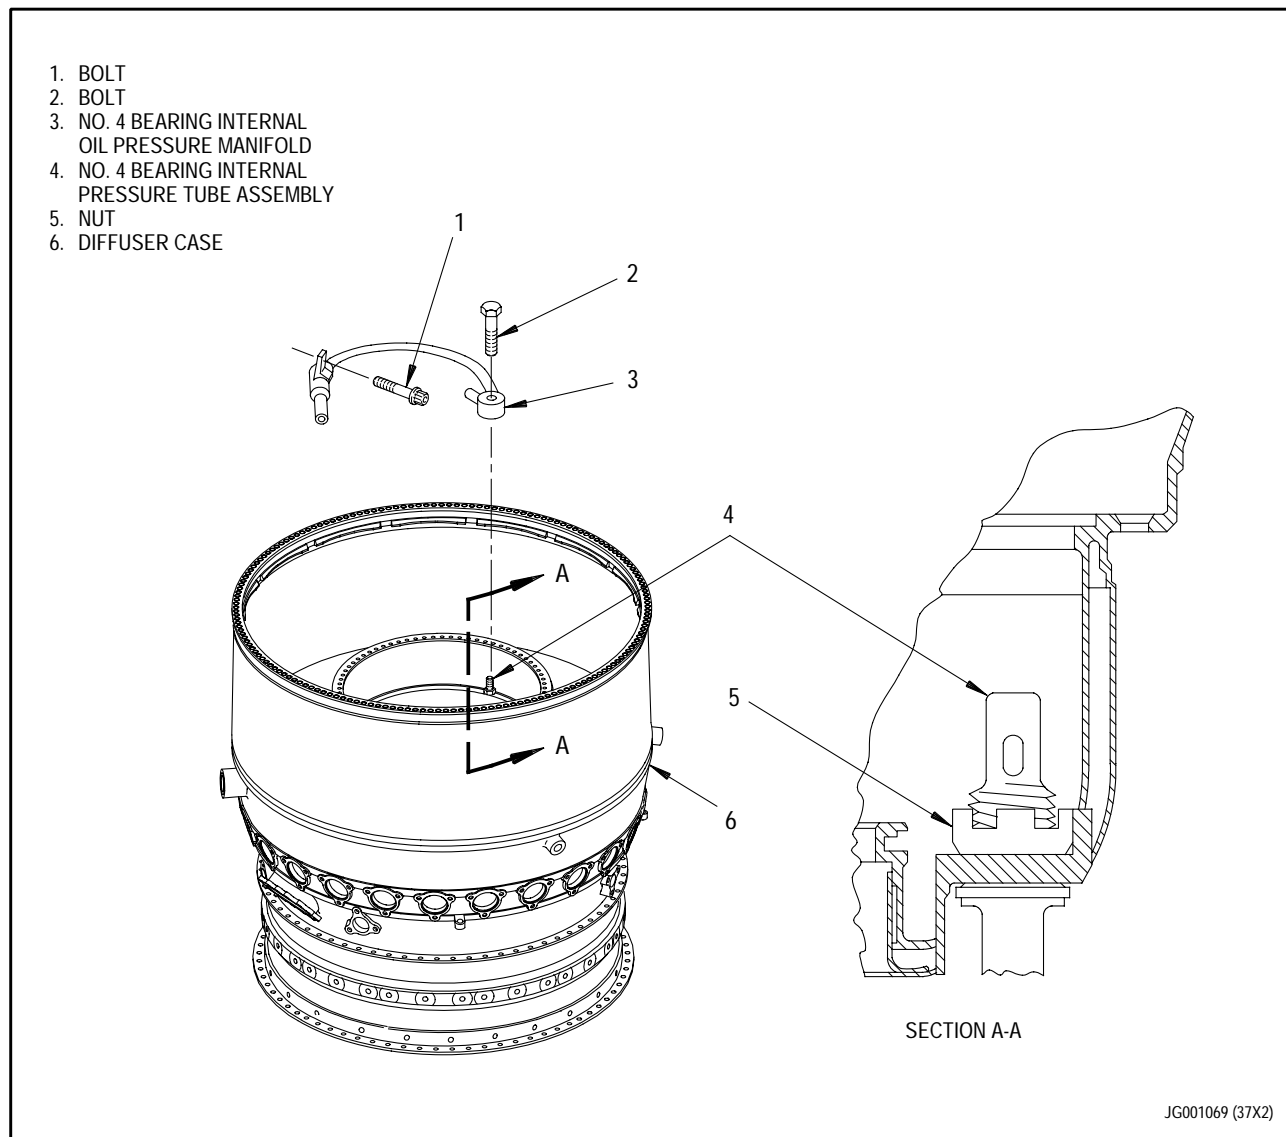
No. 4 Bearing Internal Oil Pressure Manifold - Removal
